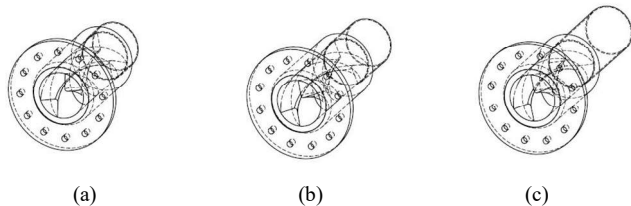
Swirling nozzles with extension tube; (a) with 105mm extension tube, (b) with 210mm extension tube, (c) with 315mm extension tube
